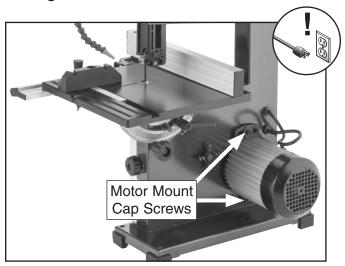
Location of motor mount cap screws used for adjusting belt tension.
